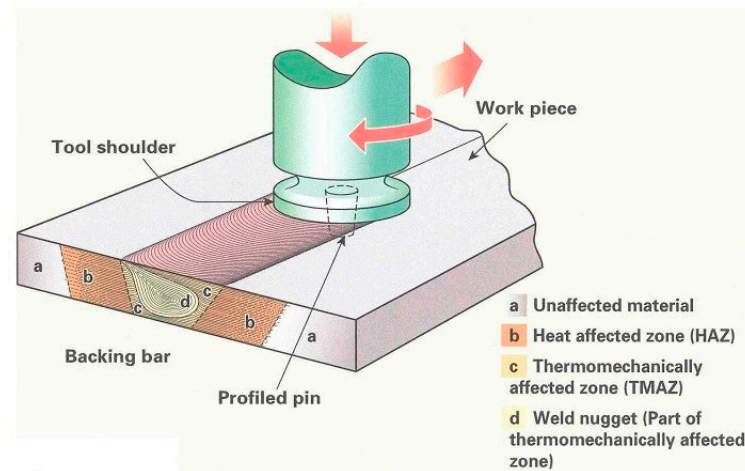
A visual representation of the FSW process detailing the critical zones and the interaction between the tool and the workpiece during welding. Source: <https://www.twi-global.com/technical-knowledge/job-knowledge/friction-stir-welding-147> (accessed on 24 August 2024).
